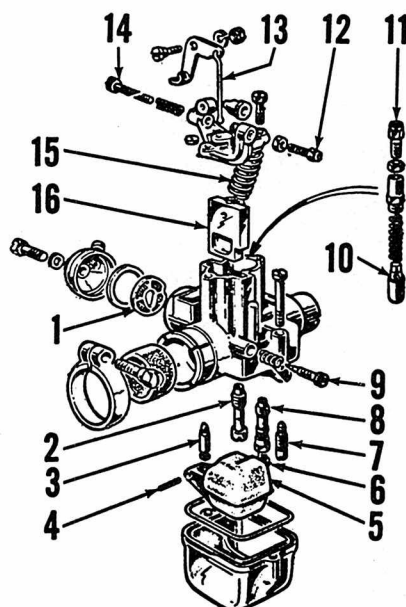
Exploded view of typical SH carburetor. Model SHB used on Cento is not provided with pilot jet (7) and atomizer (8).
